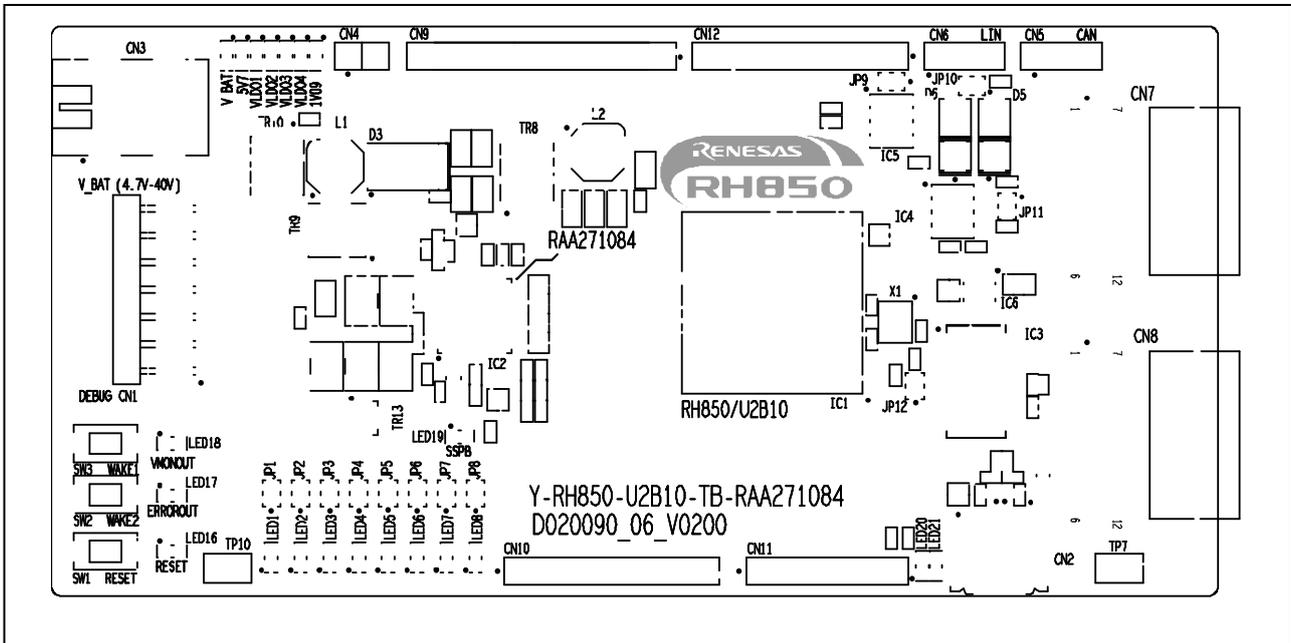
Placement of components on the top side of the target board for board version D020090_06_V02
